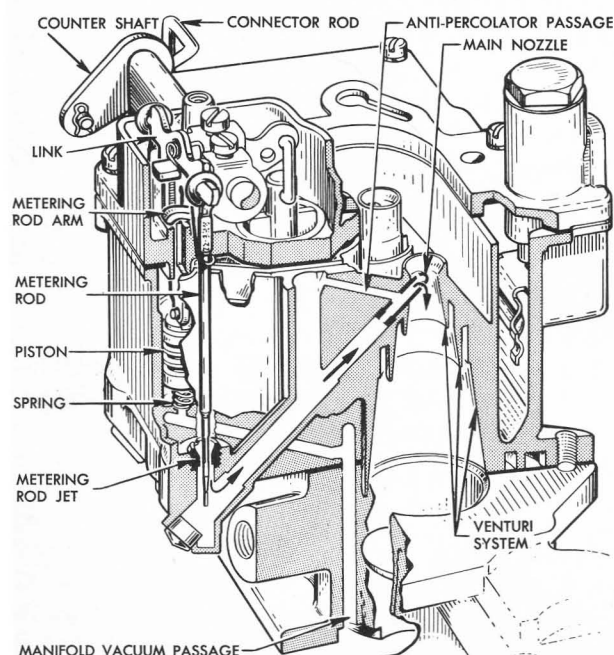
High Speed and Power Systems—Carter Carburetor
